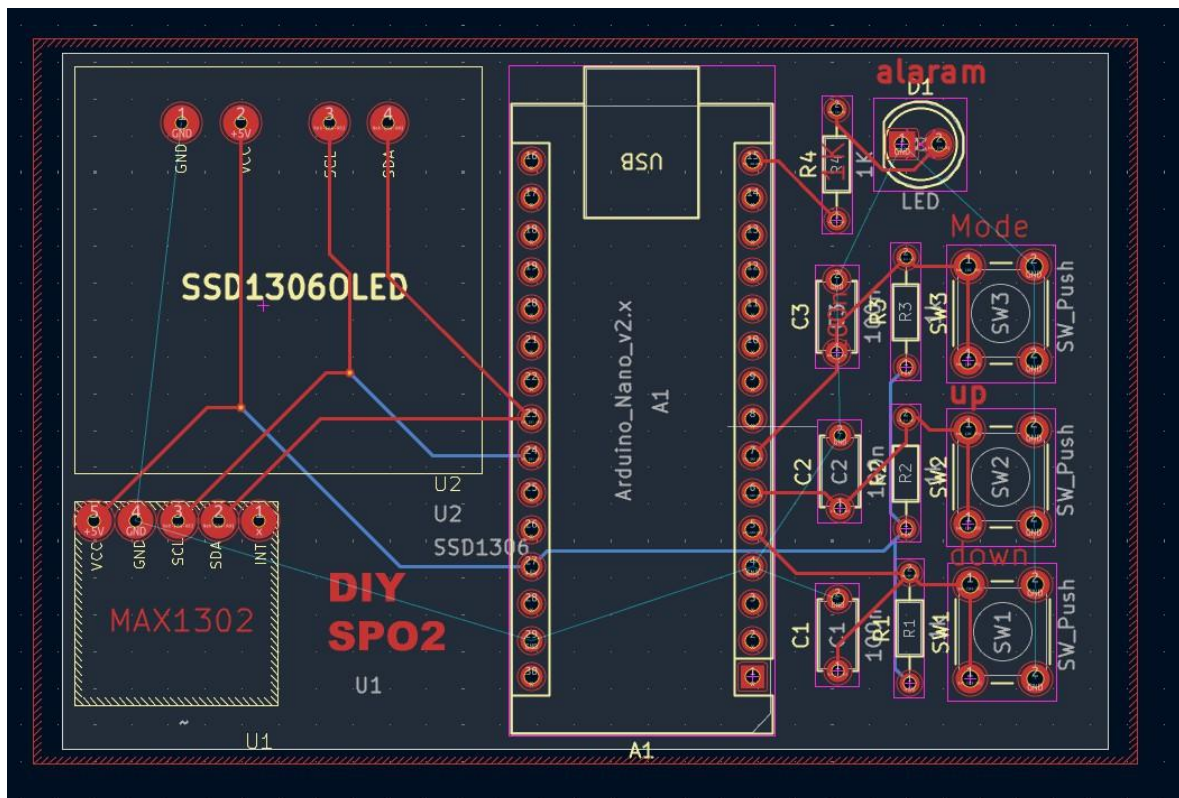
Top-viewPCB routing layout (red = top copper, blue = bottom copper).
